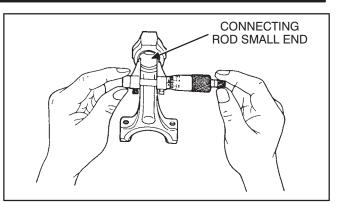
MEASURING CONNECTING ROD PIS-TON PIN BORE
